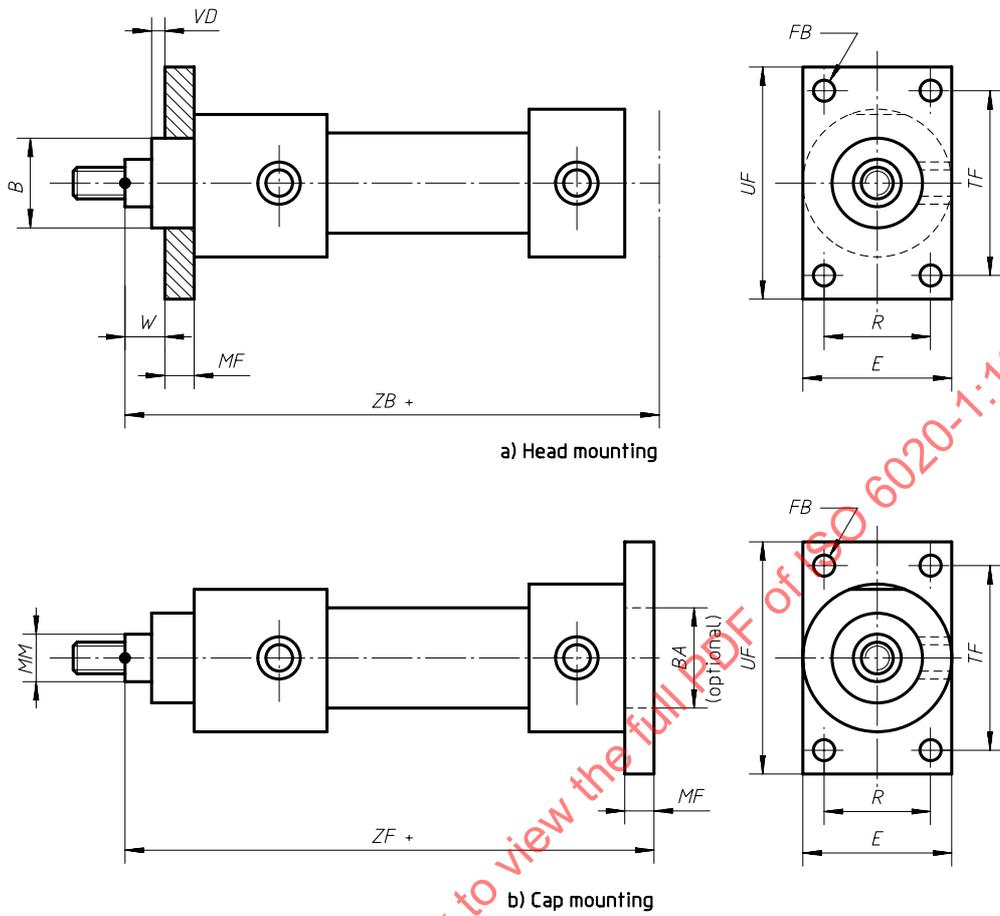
MF1 — Head rectangular flange mounting and MF2 — Cap rectangular flange mounting
